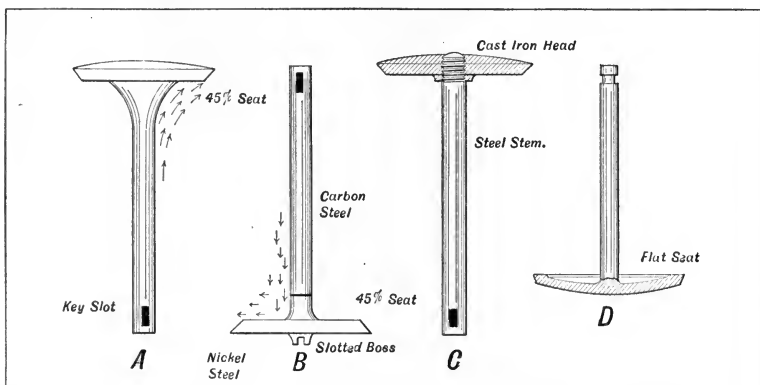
Type of Valves in Common Use. A—One-Piece Steel Valve of Good Design which Permits Easy Gas Flow. B—Steel Valve Made by Electrically Welding a Nickel Steel Head to a Carbon Steel Stem. C—A Construction Often Employed for Exhaust Valves, a Two-Piece Built-Up Member. D—Valve with Flat Seat, Often Used to Admit Mixture to Cylinder.
